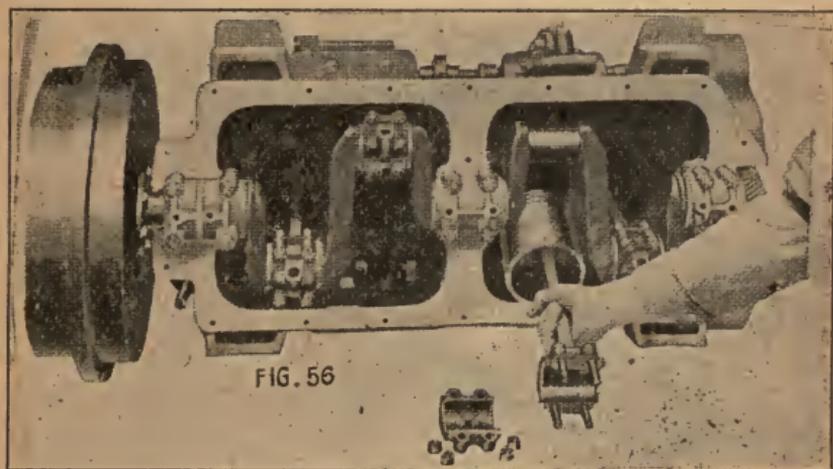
Lower crank case removed, showing main bearings, connecting rod and bearing, and the case with which piston is removed in Waukesha engine.
